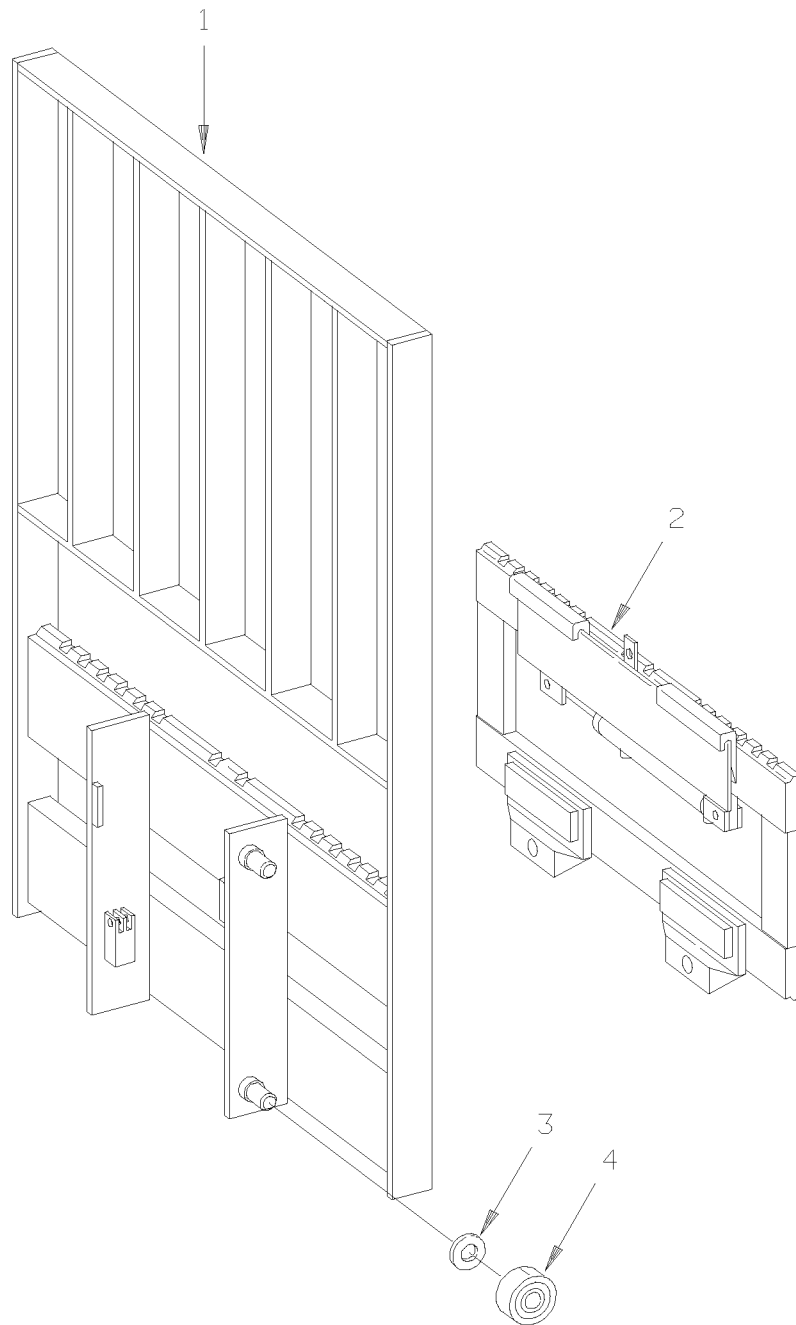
SC-30 THREE STAGE MAST INTERMEDIATE COLUMN ASSEMBLY
